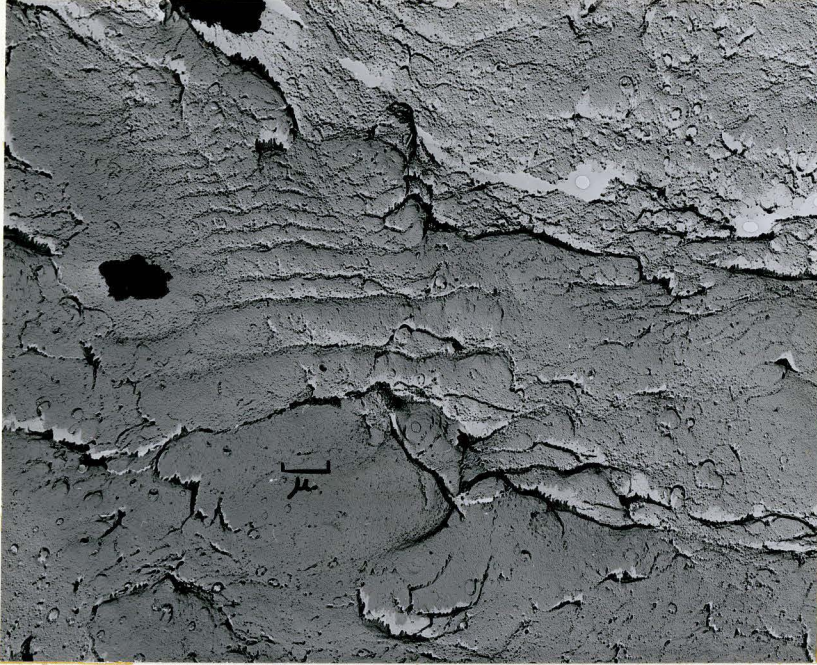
Electron fractograph of fatigue fracture surface.
